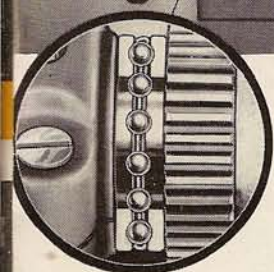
Heat-Treated Alloy Steel Headstock Spindle with Precision Ground Bearing Surfaces
